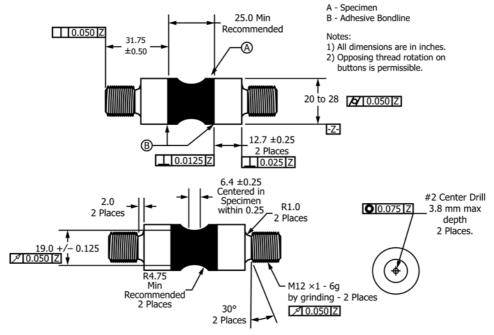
Drawing of End Tabs and "Spool" Specimen Assembly (SI units)
